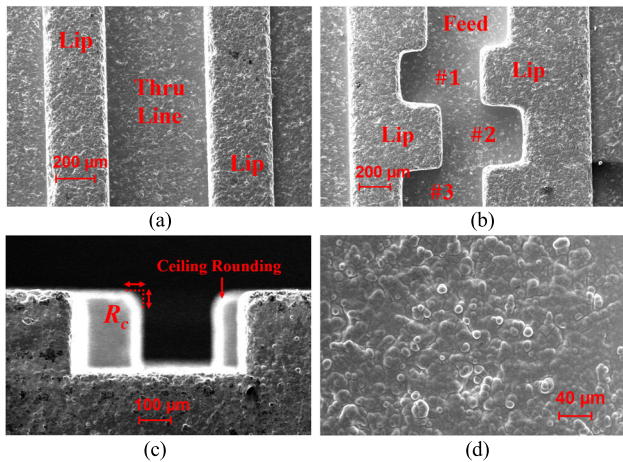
SEM images for 3-D printed MPRWG components (after copper plating): (a) thru line; (b) 3rd order Chebyshev filter; (c) close-in flange view of the bottom part of the filter; and (d) close-in plan view of the bottom trough surface.
